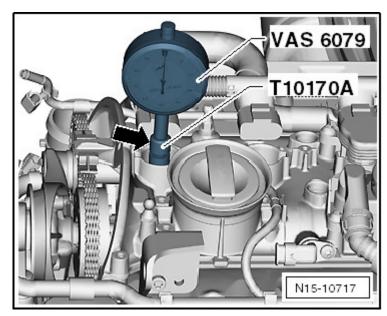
Identifying Dial Gauge -VAS 6079- With Extending Piece -T10170A/1-
